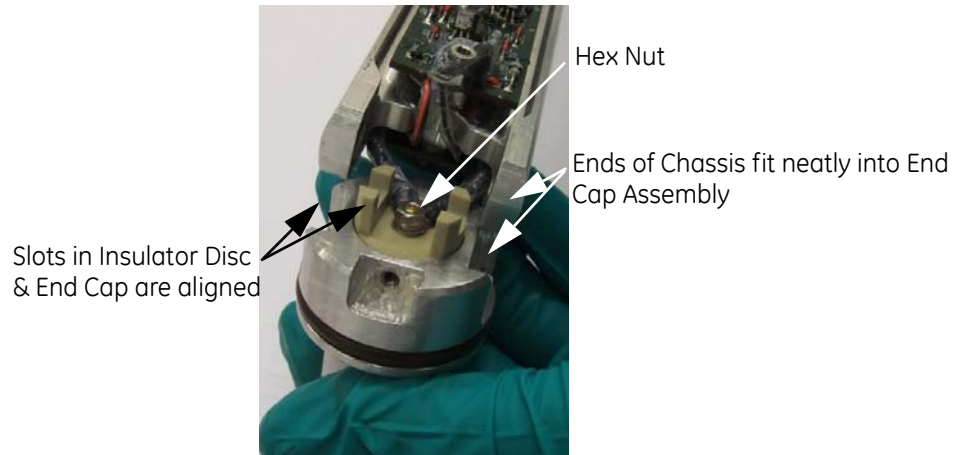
The Upper End Cap removed from Electronics Chassis
